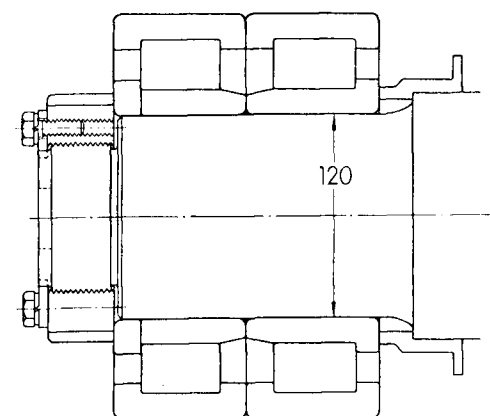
Axle bearing arrangement incorporating cylindrical roller bearings. U.I.C. 120 mm journal. Bearing dimensions: $120 \times 240 \times 80$ mm.
